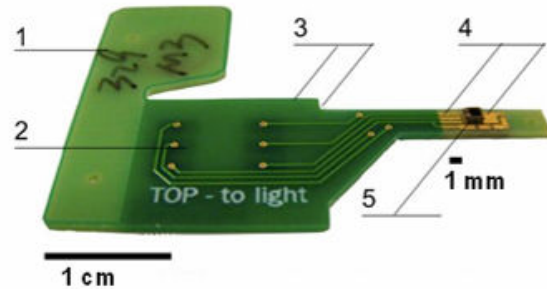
Flexible Test Bed solar cell carrier board. 1. handle and ID # surface; 2. SIM card contact; 3. alignment faces; 4. wire bond pad; 5. solar cell.
